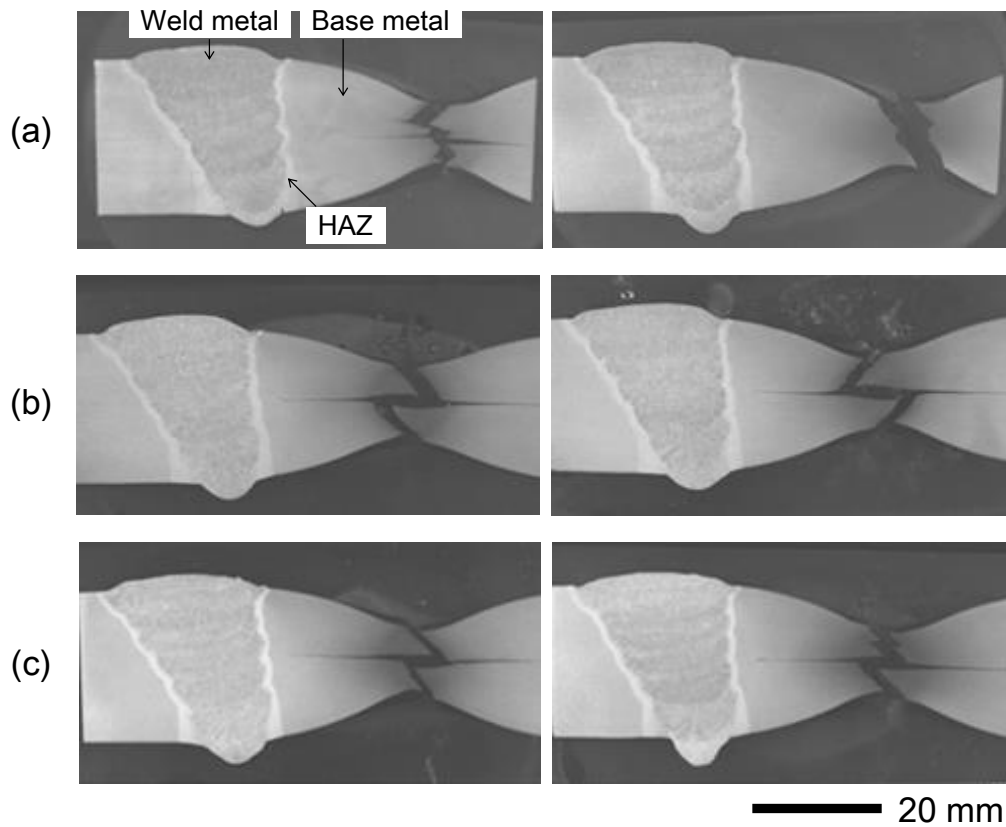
Macrographs of girth weld tensile specimens: (a) as-welded, (b) PWHT625 °C, and (c) PWHT675 °C
